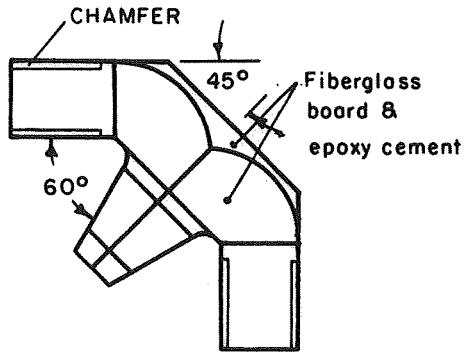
Laminated side and lift force cone pole-piece subassembly
